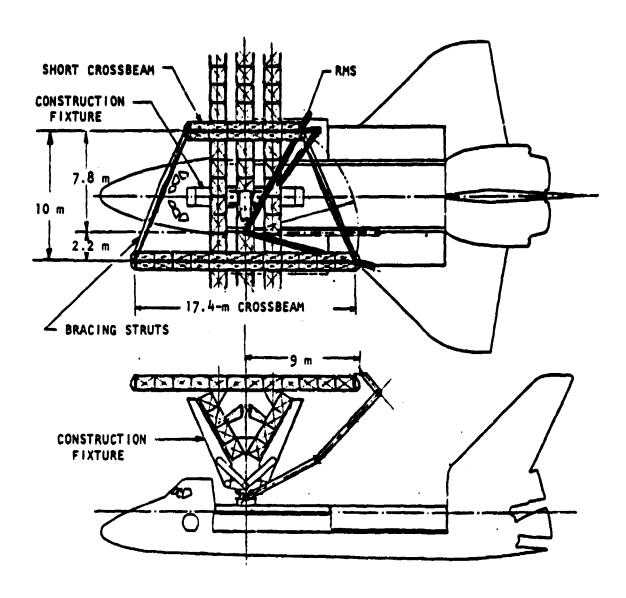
Stabilizing Strut Installation Concept
